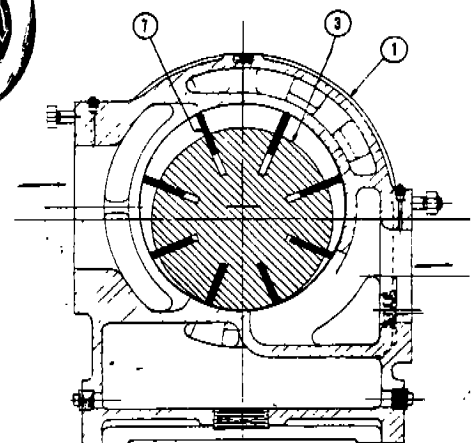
End view of a sliding-vane compressor. rotor turns clockwise closing the annular cells into the discharge chamber. Courtesy of Allis-Chalmers Manufacturing Company
